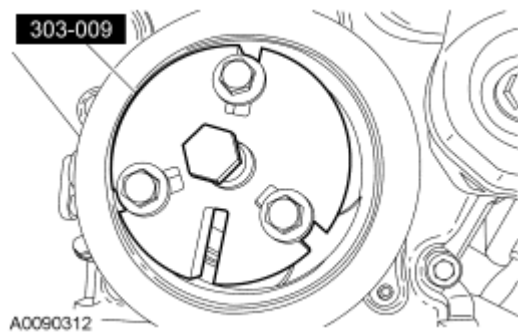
Removing Crankshaft Pulley Using Special Tool (303-009)
